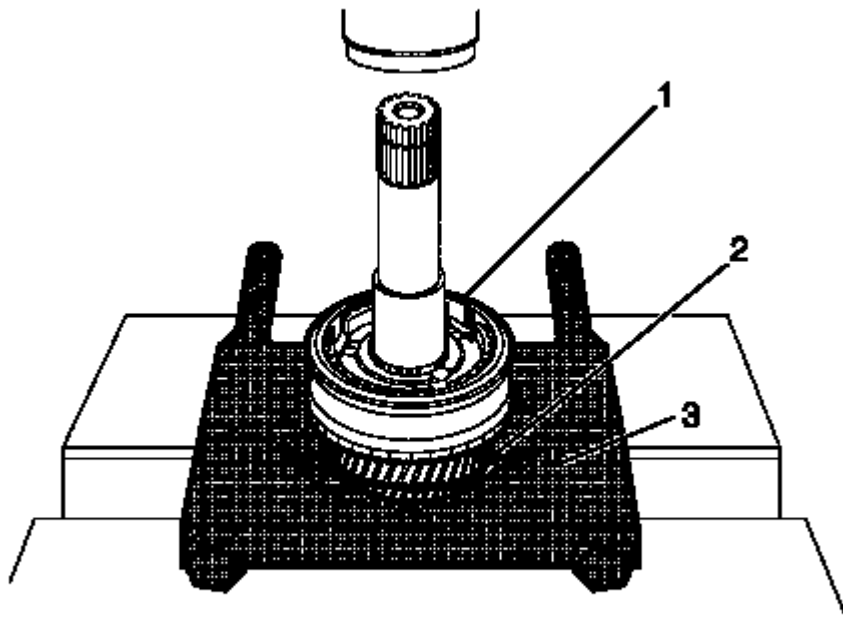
3rd-4th Synchronizer Hub Assembly
